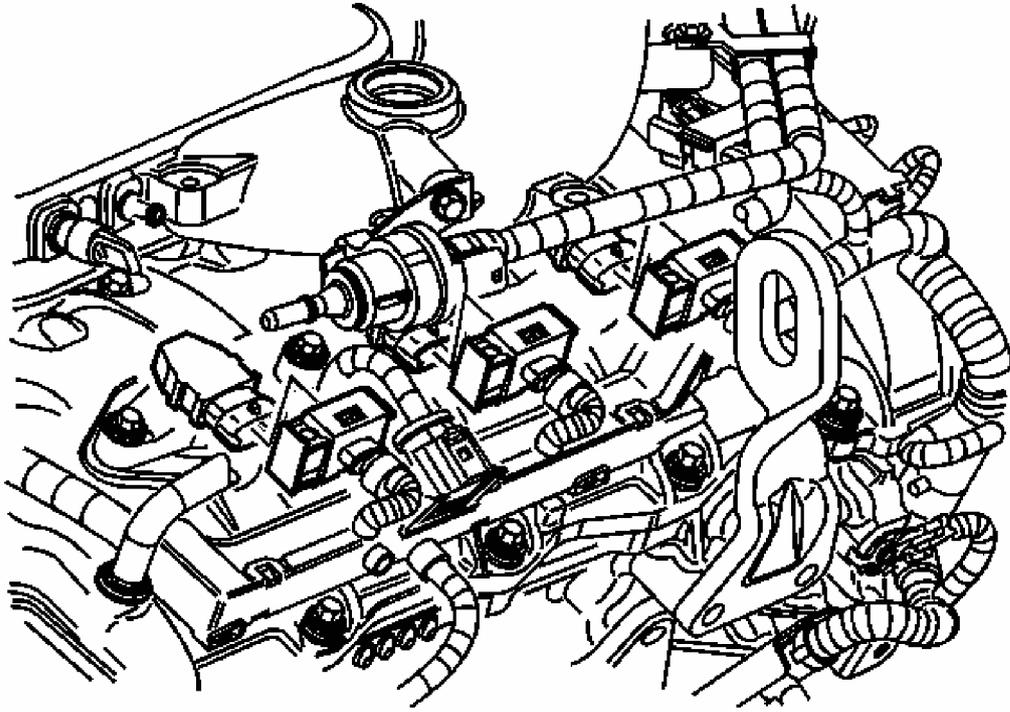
View Of Right Ignition Coils Electrical Connectors
